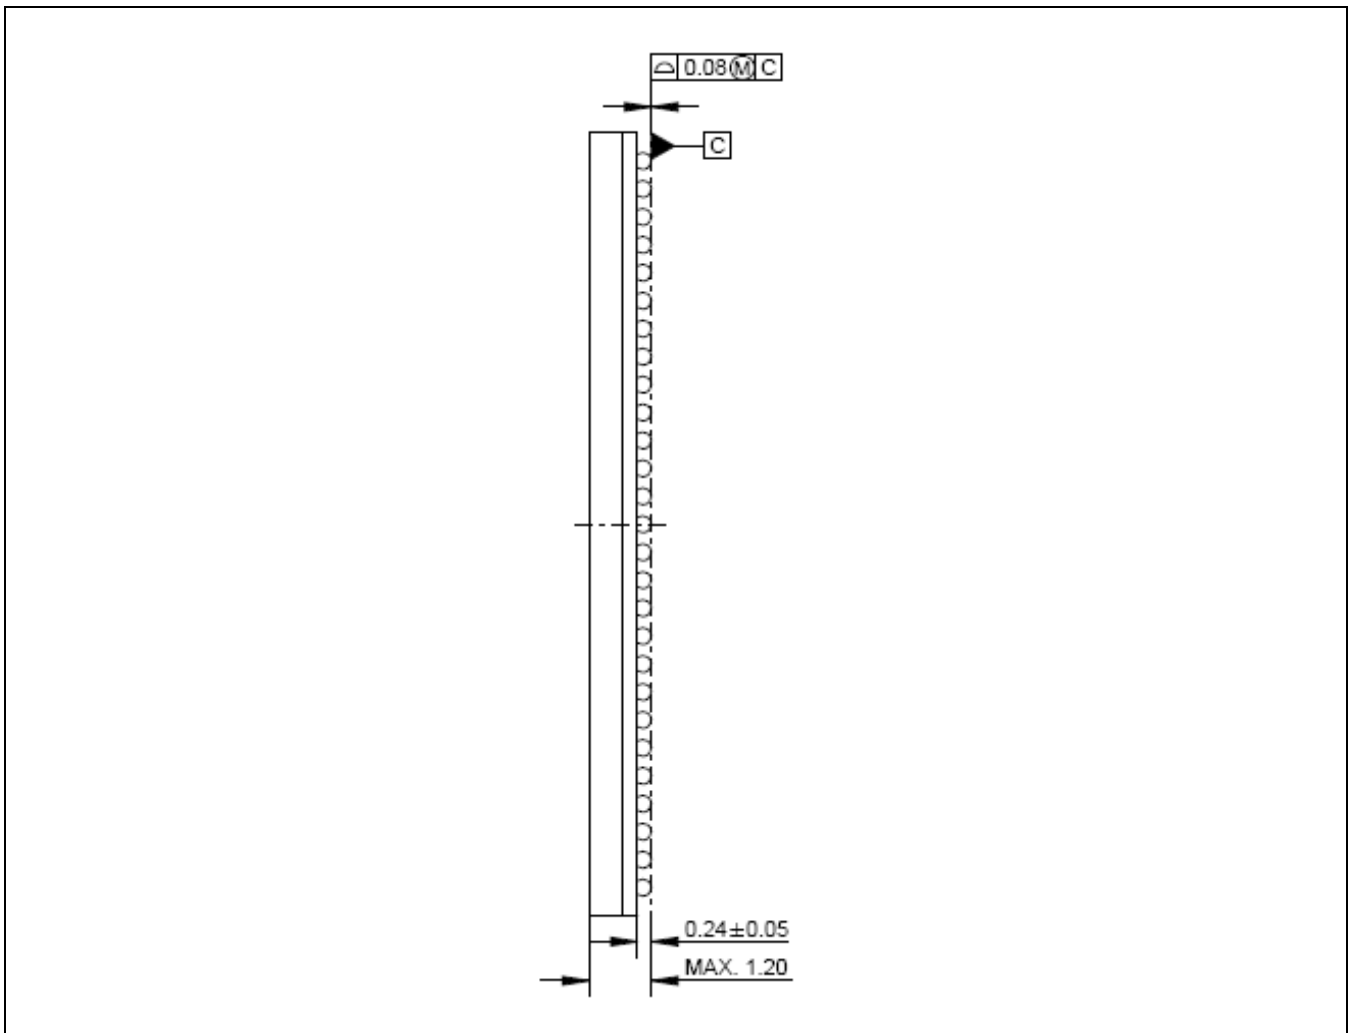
2 S5PC100 Package Dimension (521-FCBGA) – Side View
